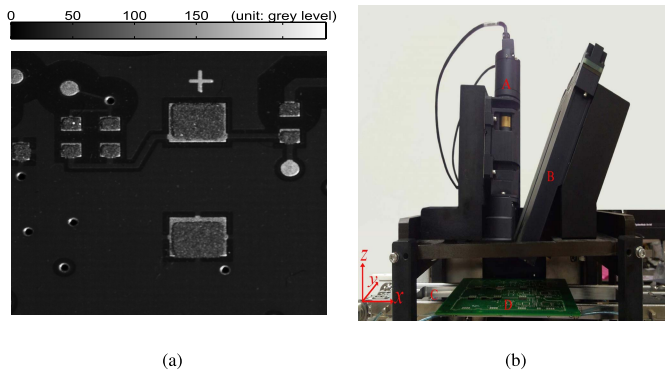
(a) 2-D image of a part of the PCB under inspection. (b) Physical setup of our INSPECT system. A: the imaging system, B: the projection system, C: the conveyor belt for transferring objects, and D: the PCB under inspection.
